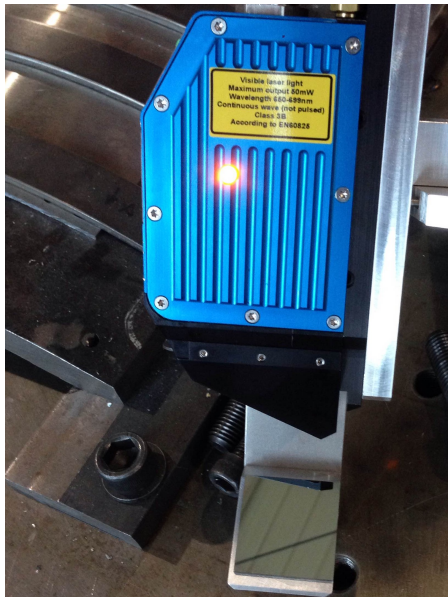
Mirror attached to laser seam tracker used in the experiments. Redirecting the laser beam allowed for measurements closer to the FSW tool tip.
